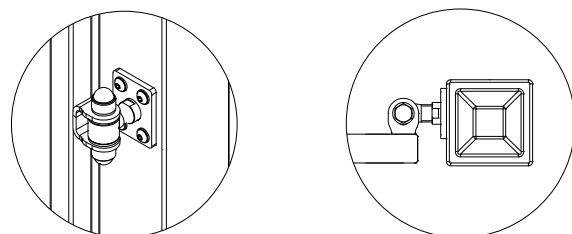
Adjustable brackets for the BFT PHOBOS BT A25 and BFT PHOBOS BT A40 drive units.
